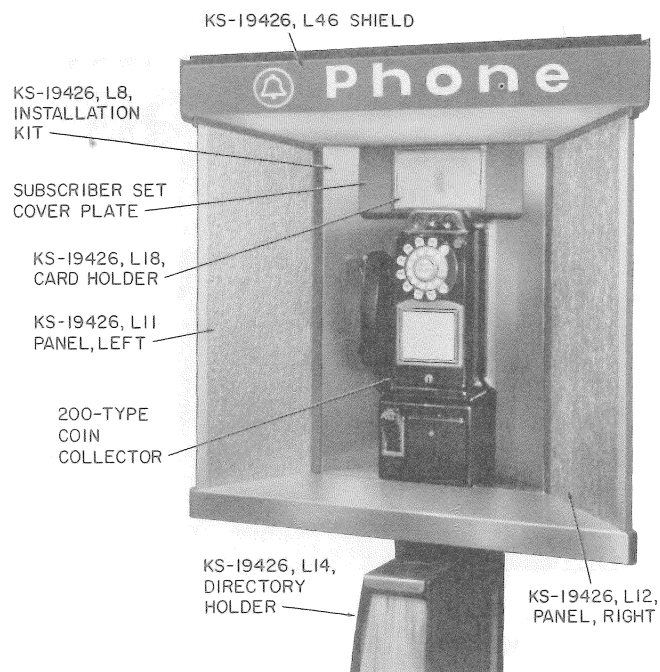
KS-19426 Mounting Using 200-Type Coin Collector
